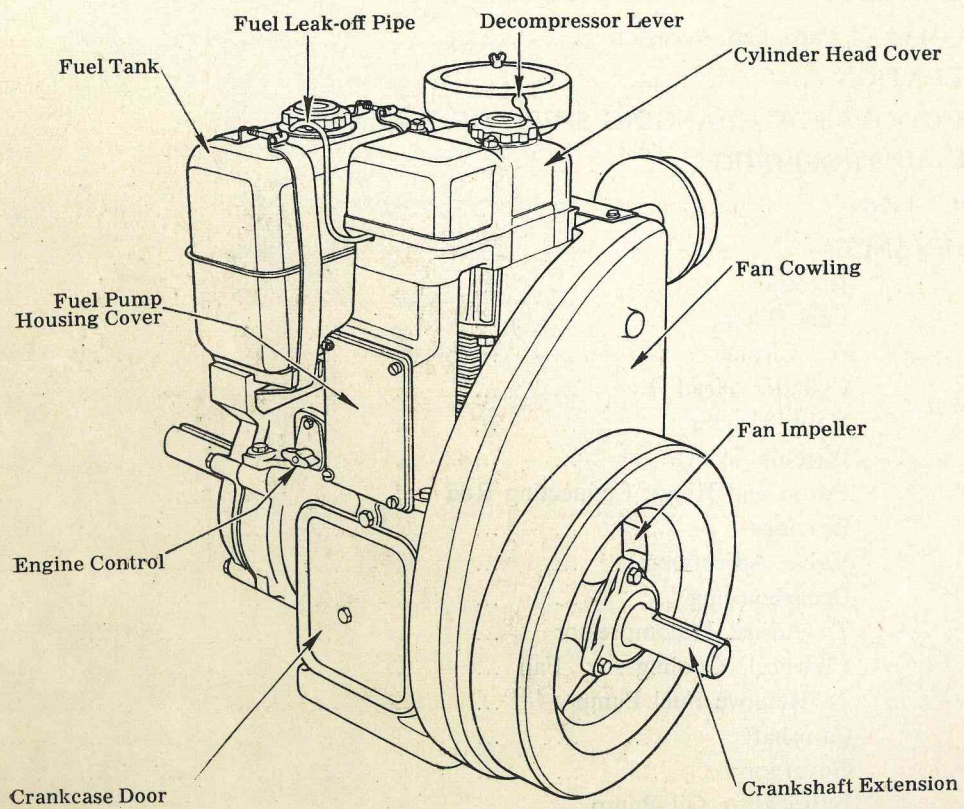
Type LD1 or SL1 Engine—Front View.
